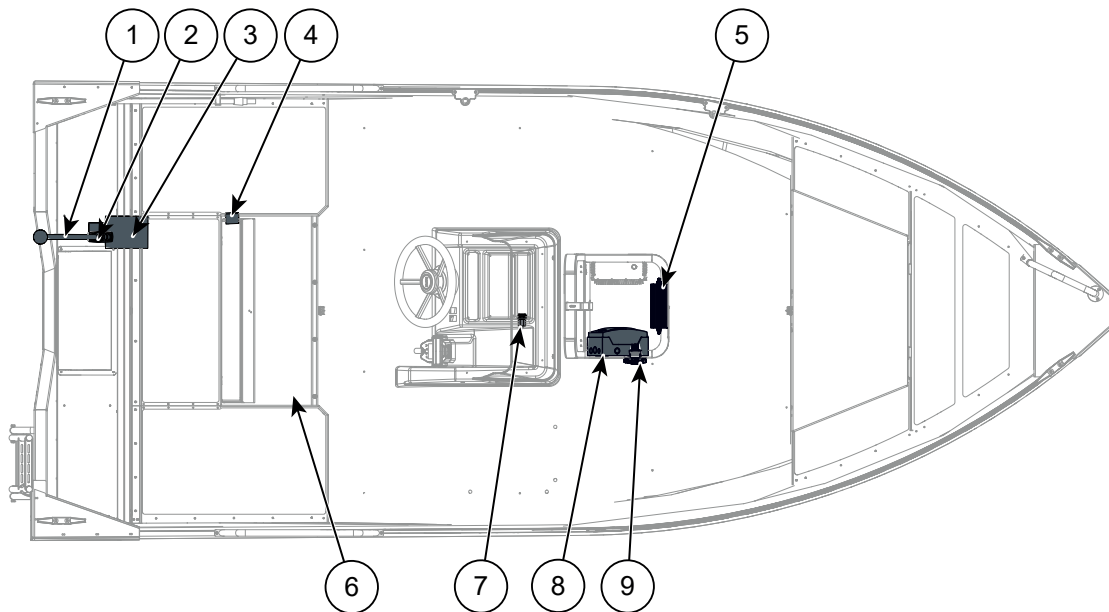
Buster XSr Torqeedo location of electrical equipment
